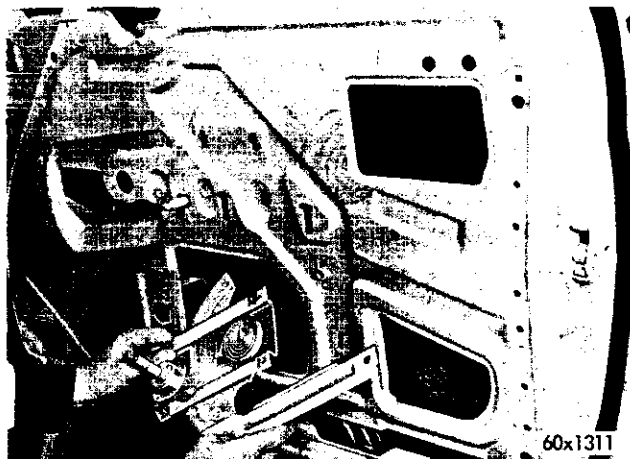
Removing the Front Window Glass Manual Regulator Assembly (Chrysler)
